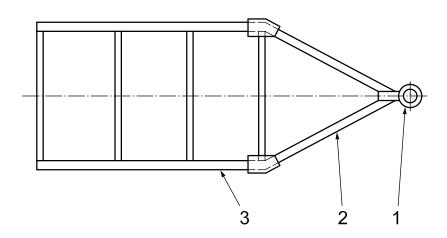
Drawbar as a separate technical unit from beginning to end
